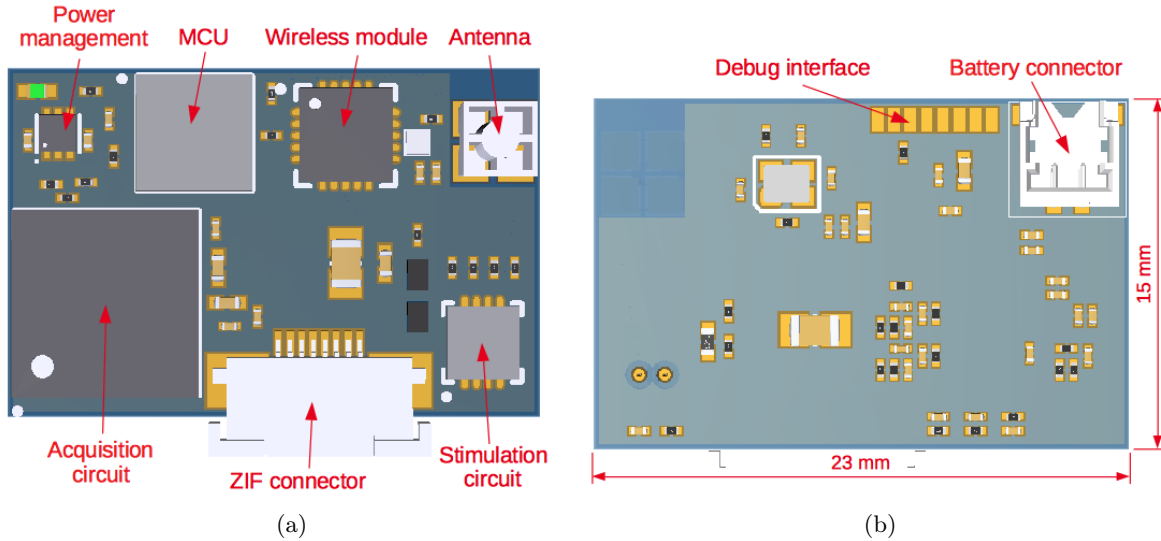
CAD representation of the new miniature PCB : (a) top of the PCB with most of the components and (b) bottom of the PCB.
